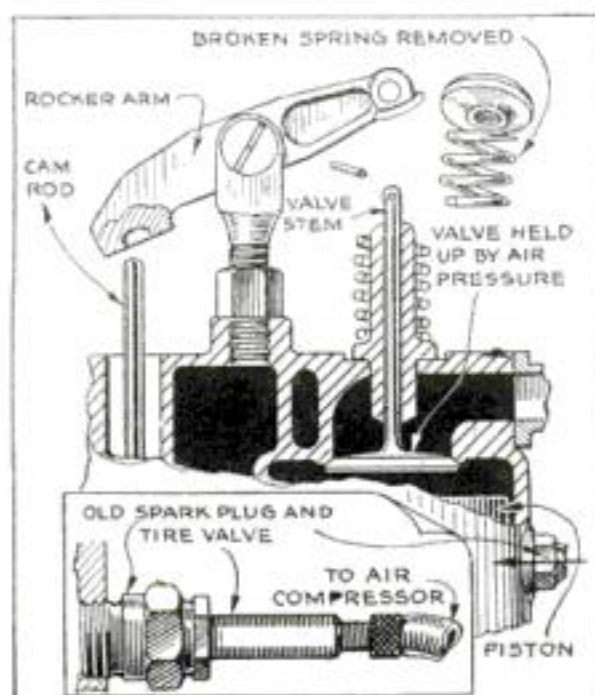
Air pressure used to make a quick change of valve springs on overhead motor.
